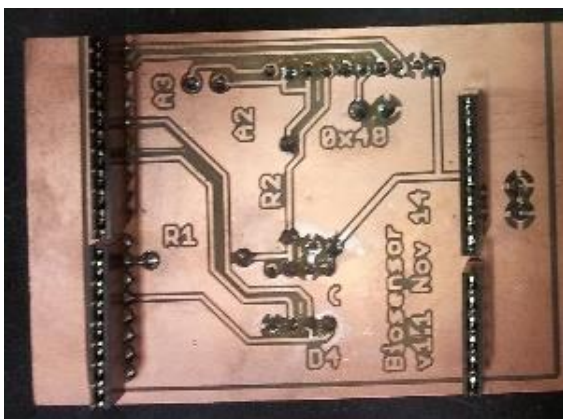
PCB shield, bottom view. Though it could only control a single electrode-pair, the switch to a PCB was a major upgrade over the breadboard and jumper-wire prototypes.
